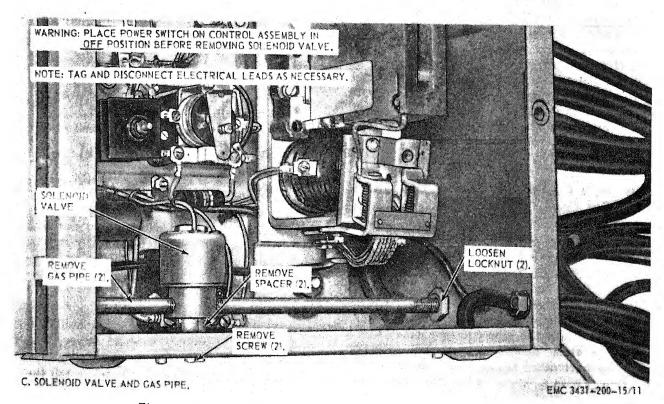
Hose assembly, solenoid valve, and gas pipe, removal and installation.
